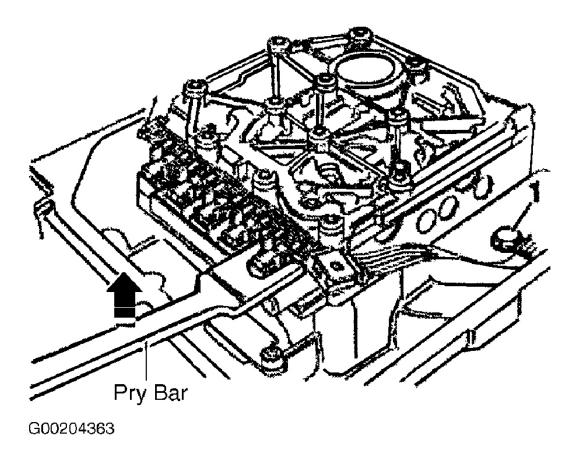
Prying Up On Conductor Strip Courtesy of VOLKSWAGEN UNITED STATES, INC.
